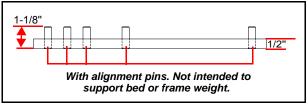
Arm Transfer Jig- Key P/N 1077800
